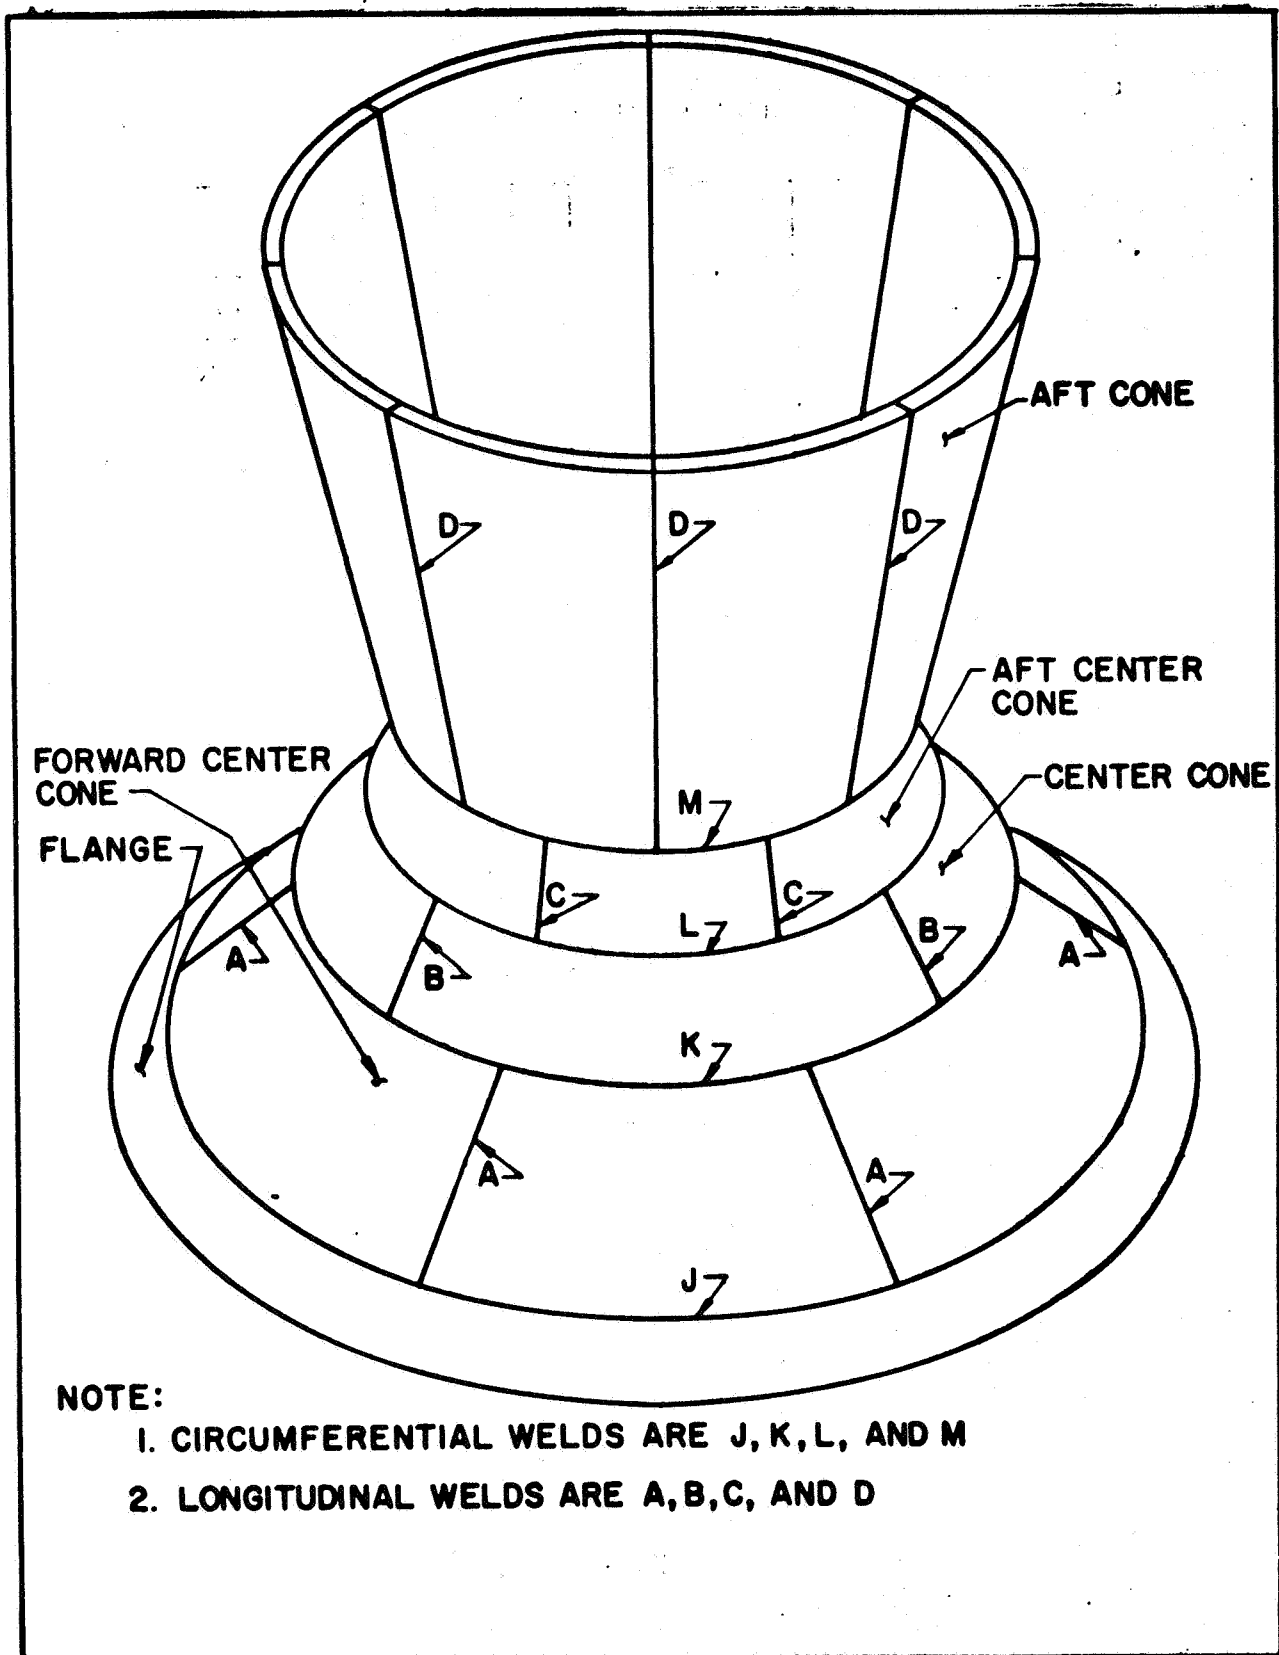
156-2C-1 Nozzle Steel Shell Circumferential and Longitudinal Welds
